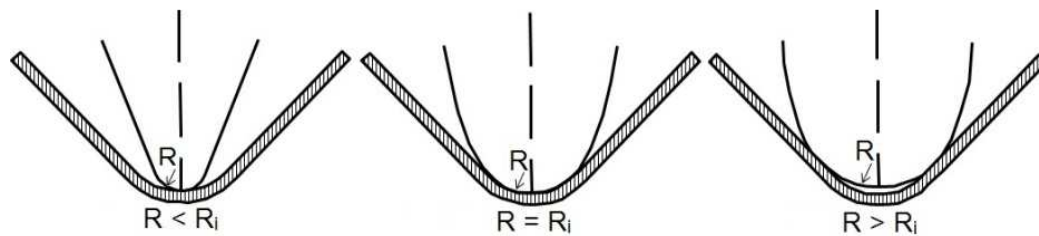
With relatively thin sheets, punch radius has no effect on the shape of the bend. R =punch radius, R_i =internal bend radius on the sheet after unloading.
